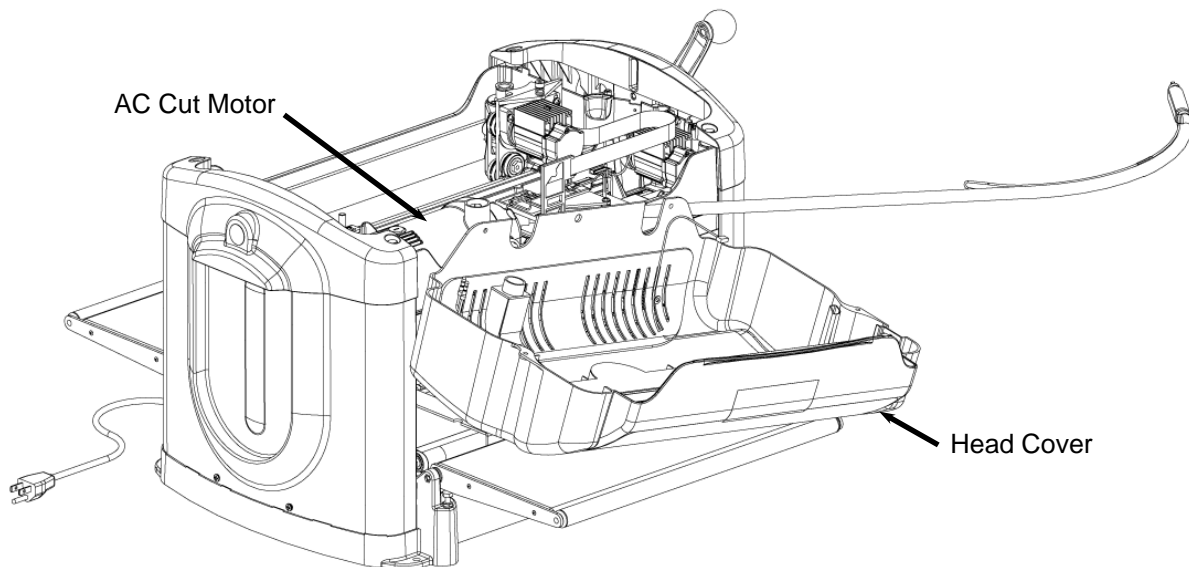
EXPLODED VIEW OF THE REMOVED COVER
